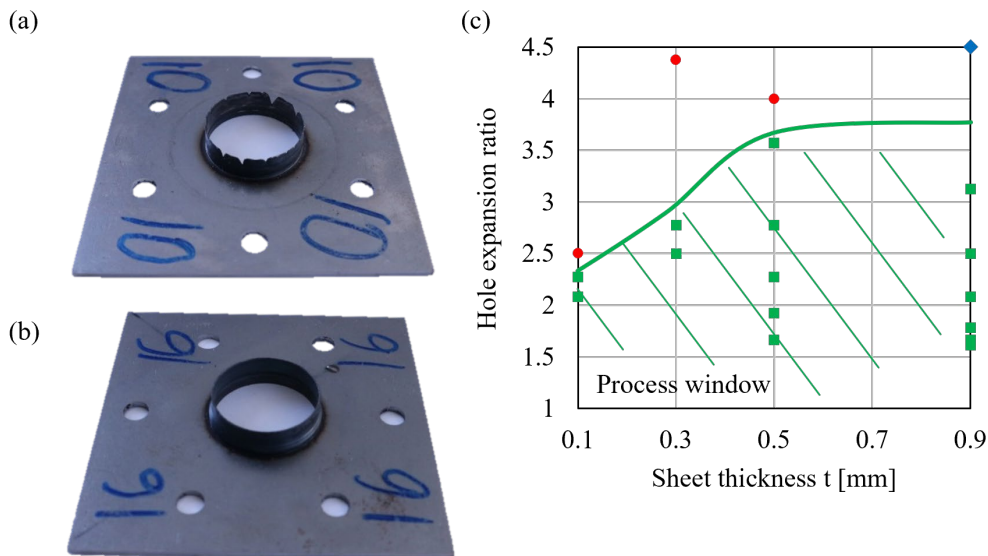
(a) Flange with cracks. (b) Successfully formed flange (c) The maximum HERs for flanges with different initial blank thickness.
